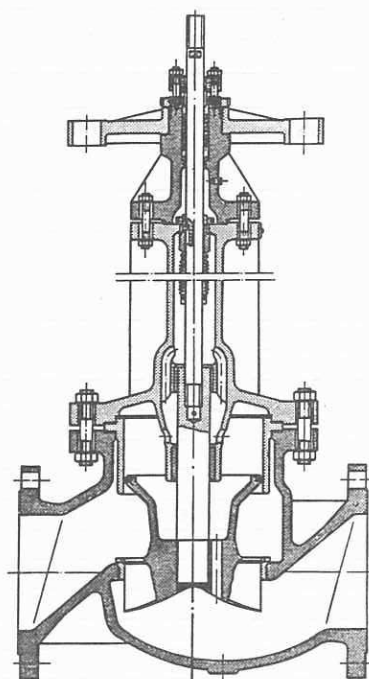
Globevalve, DN 200, flanged RF, bellows seal bonnet, V-Port plug, pressure balanced
